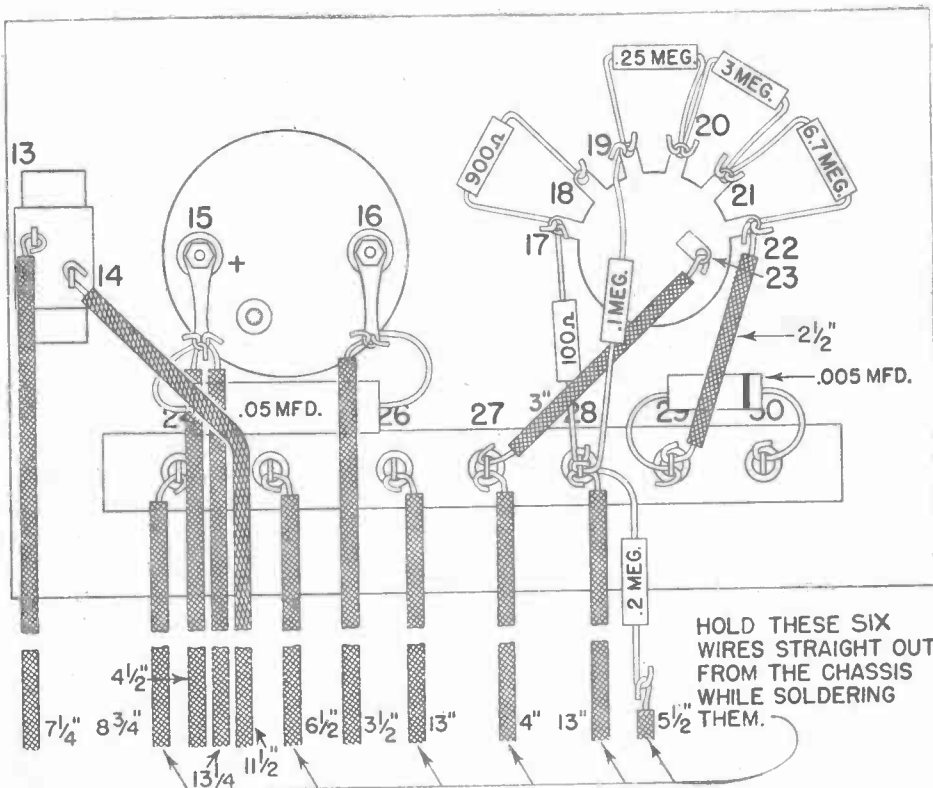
Rear view of front panel after all leads and parts have been connected with permanent soldered hook joints. The length in inches to which you should cut each piece of hook-up wire is indicated alongside the wire. To save space in this manual and to simplify this diagram, the long leads are shown in shortened form below the panel. Each of the six long jack leads should be held at right angles to the panel while being soldered; these wires can then be bent to the right along the bottom of the panel so they will not interfere with your work. At this stage of the assembly, all joints should have closed hooks and be soldered exactly according to the instructions in the text.
